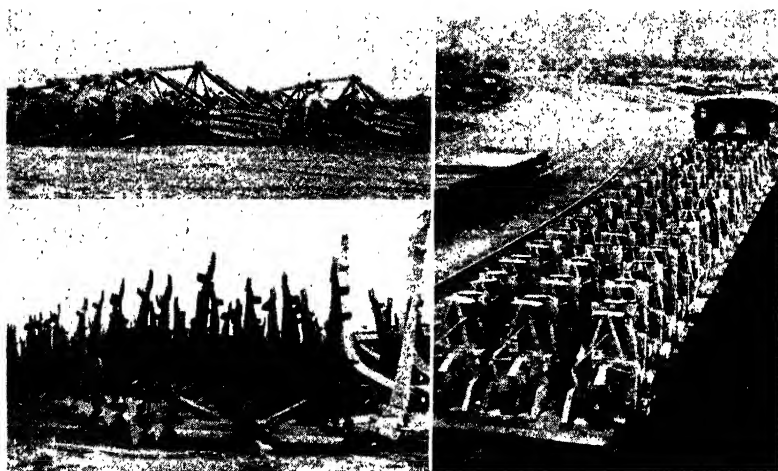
The all-welded, high-speed power control units (right) and scrapers (upper) and angledozers shown here are only a fraction of a week's mass-production output of one plant. Of 300 welding machines in this plant, 290 are alternating-current machines. These 290 machines deposit about 45,000 lb. of electrodes per week. (*Courtesy of R. G. LeTourneau, Inc.*)
